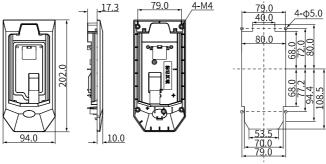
Dimensions and opening sizes (mm) of the MDKE-10 mounting base
